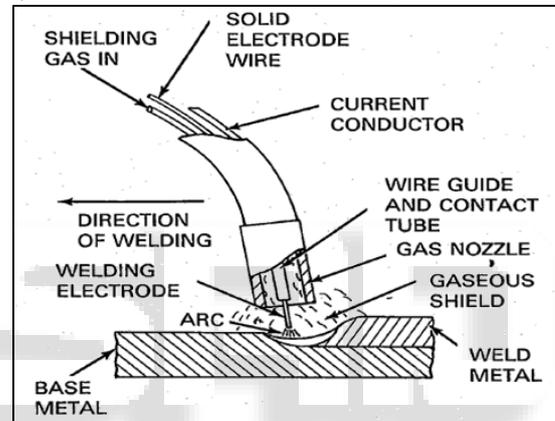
Gas Metal Arc Welding Process [2]
